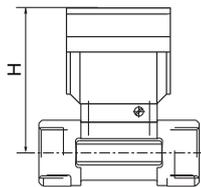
Dimension H [mm] of the 8032 depending on the S030 fitting diameter
